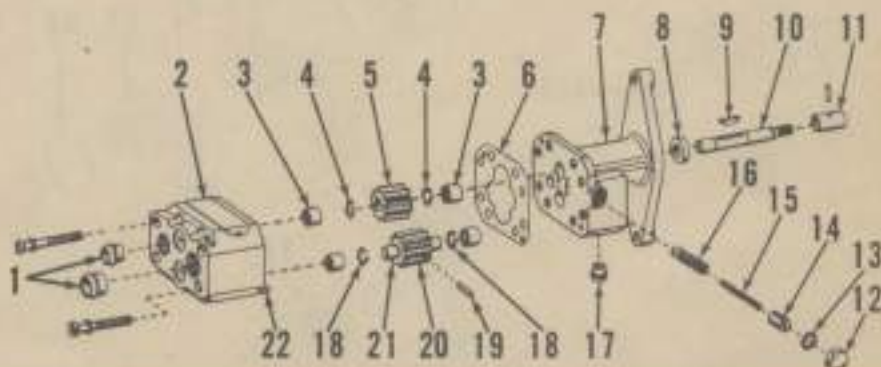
Exploded view of Barnes power steering pump used on all D-15 diesel models and D-17 diesel models prior to tractor Serial No. D17-38964. Gasket (16) was not used in early production units; however, it may be used in servicing the earlier pumps. The Barnes pump used alternately with the Webster pump (Figs. 16, 17 & 18) after tractor Serial No. D17-28963 is similar to above pump except for drive end. Refer to Fig. 20.
